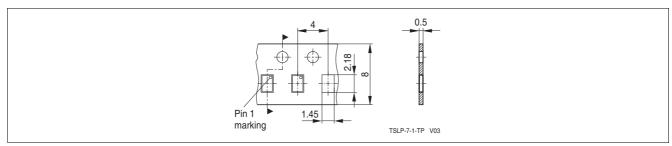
Tape & Reel Dimensions (Ø reel 180, pieces/reel 7500)
